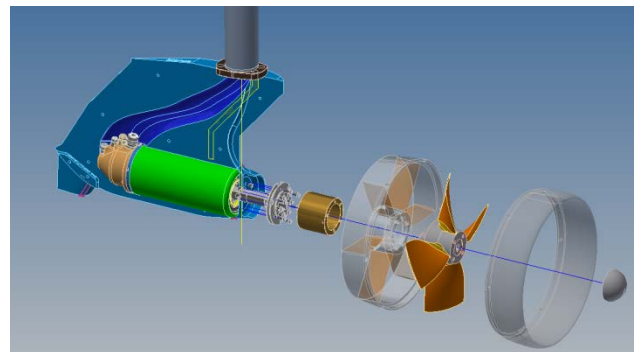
Measurement setup with electric drive, Q-T sensor with propeller shaft, 6-component sensor on which the 3D printed stator blades are mounted, propeller, transparent turned nozzle part and hub cap.
